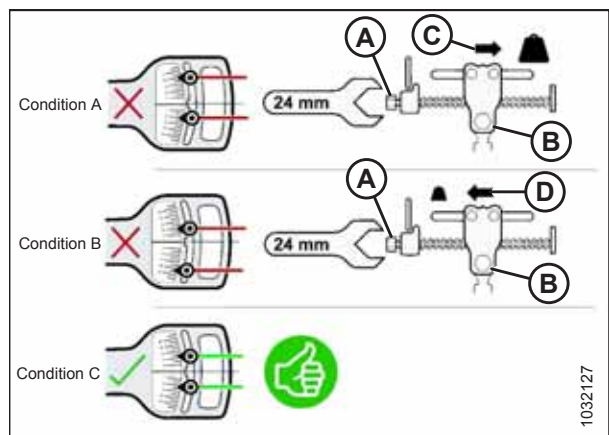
Wing Balance Adjustment – Left Side Shown
